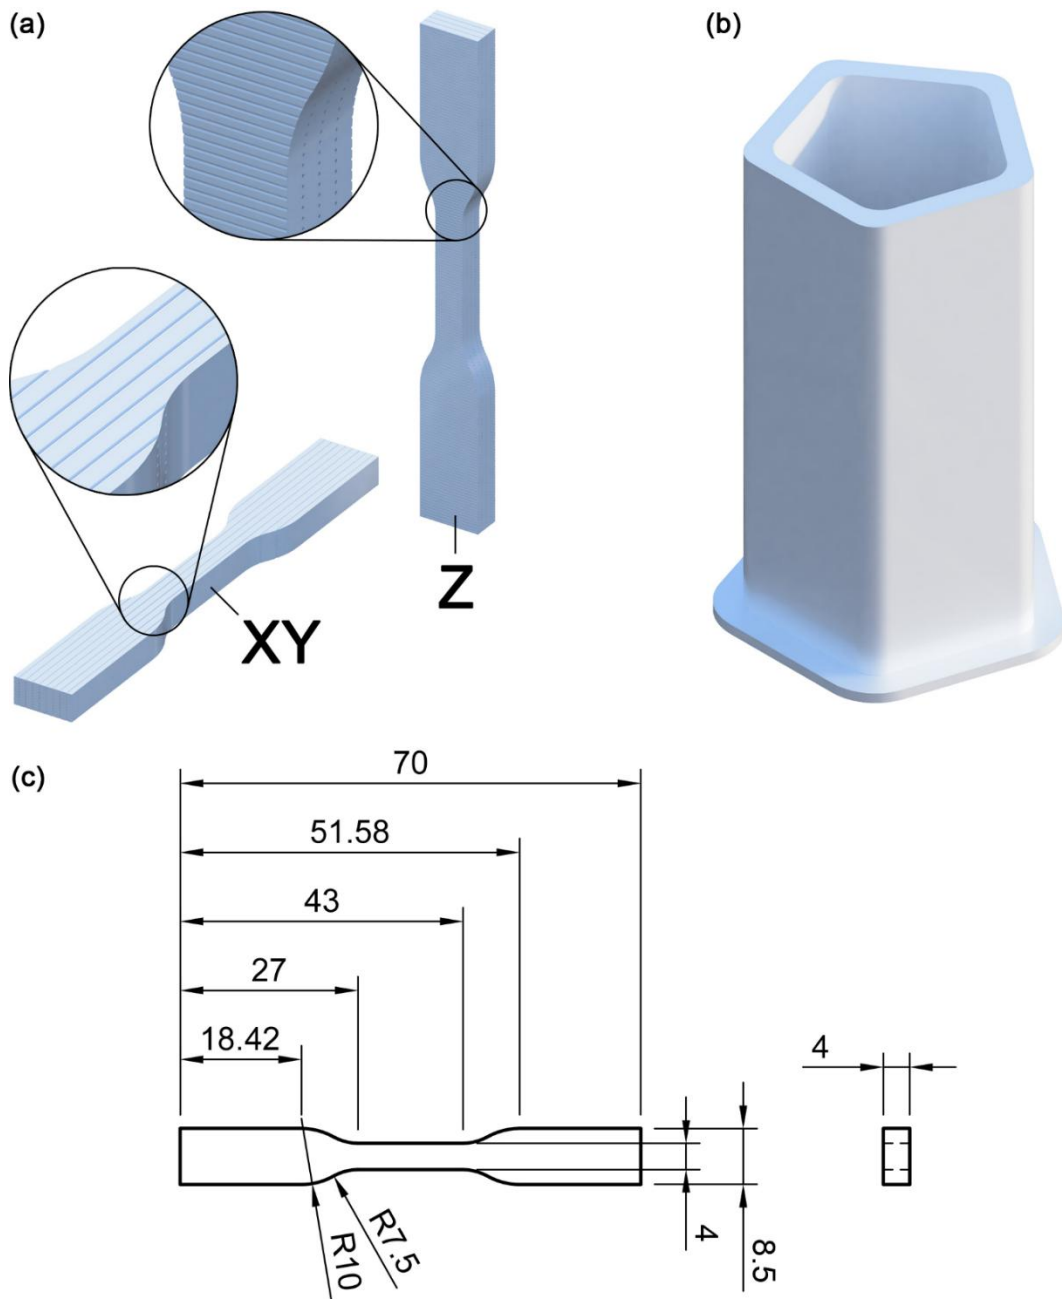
(a) Build orientation of tensile testing specimens, (b) Z orientation pentagonal prism and (c) tensile specimen dimensions.
